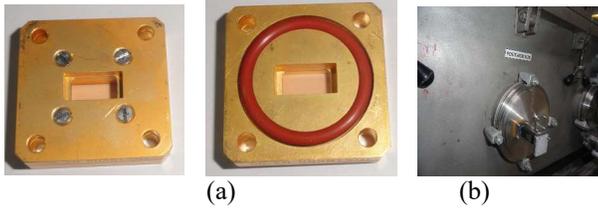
(a) Photograph of the fabricated and tested VW, (b) photograph of the mounted VW on TVAC chamber flange
